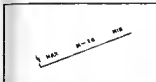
FIRING PIN PROTRUSION GAGE
